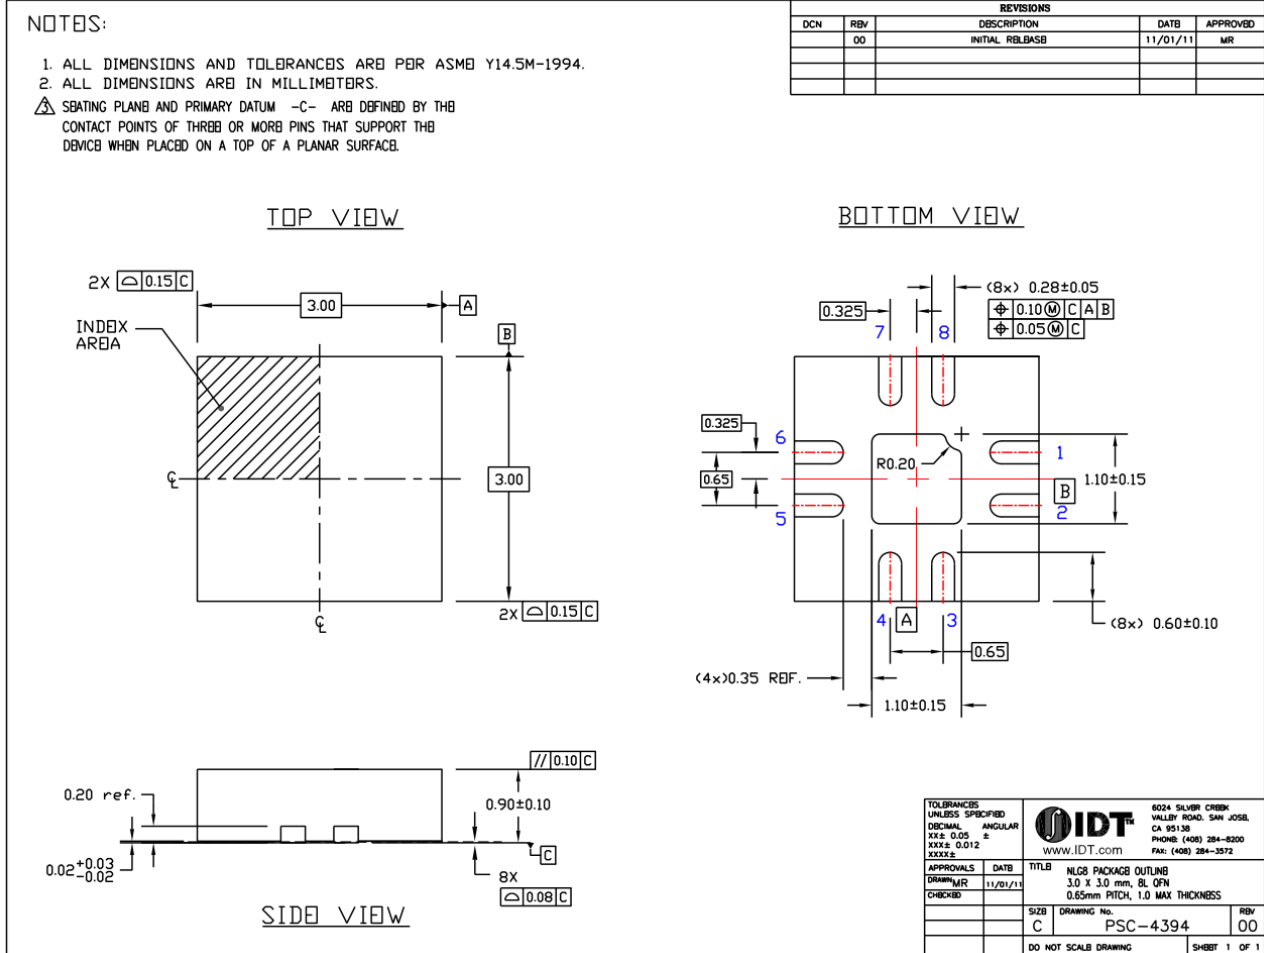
Package Outline Drawing (NLG8 QFN-8 3.0mmx3.0mmx1mm 8-ld, 0.65mm pitch)
